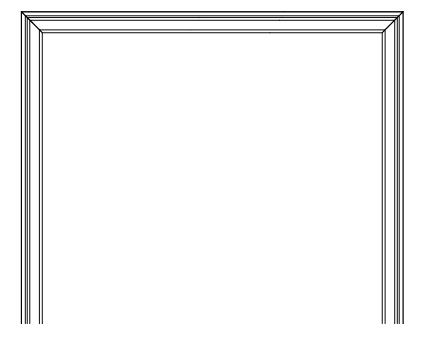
Angled cuts on Top Double Rail and Side Double Rails should make 90° corners.
